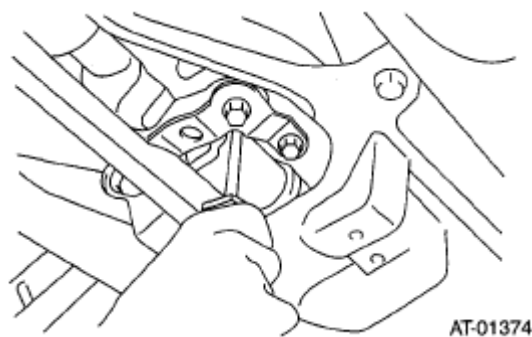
Installing Clutch Housing Cover Securing Bolts (2 Of 2)
